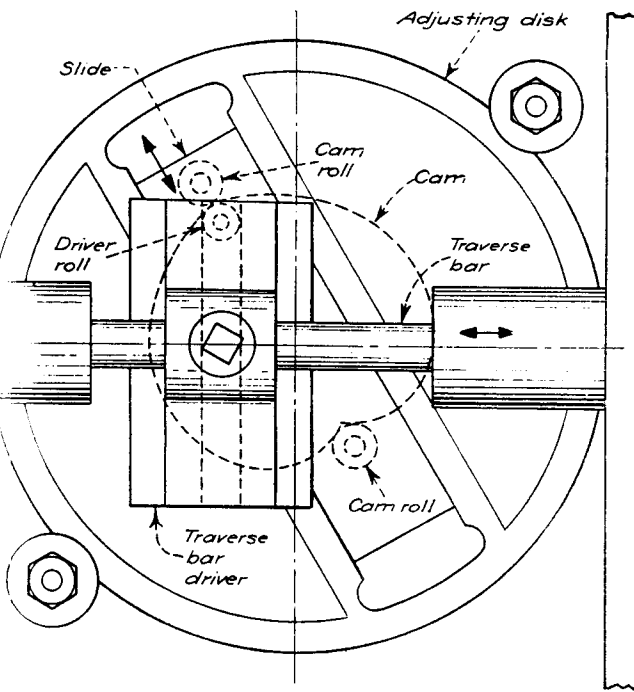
Two cam rolls that engage heart shaped cam are attached to the slide. Slide has a driver roll that engages a slot in the traverse bar driver. Maximum traverse (to capacity of cam) occurs when adjusting disk is set so slide is parallel to traverse bar. As angle between traverse bar and slide increases, traverse decreases. At 90 deg traverse is zero.
